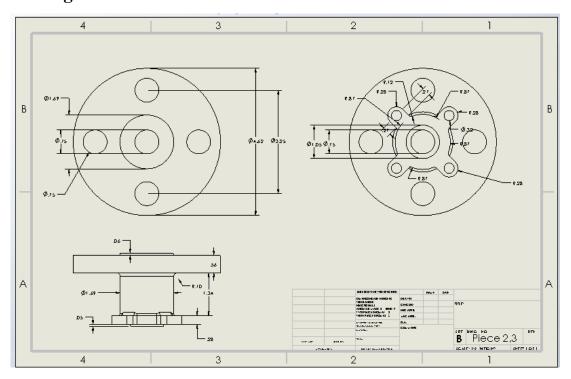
2-Dimensional Sketch of Flange Ends
